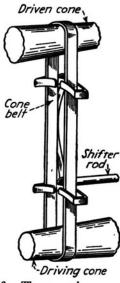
These speed cones are mounted at any convenient distance apart and connected by a belt, whose outside edges consist of an envelope of tough, flexible, wear-resisting rubberized fabric built to withstand the wear caused by the belt edge traveling at a slightly different velocity from the part of the cone in actual contact. Speed ratio changed by sliding the belt longitudinally.
